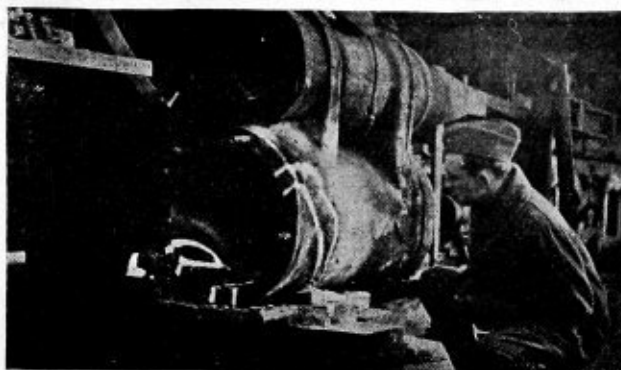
Examining the Results of the Broken Cylinder Weld
